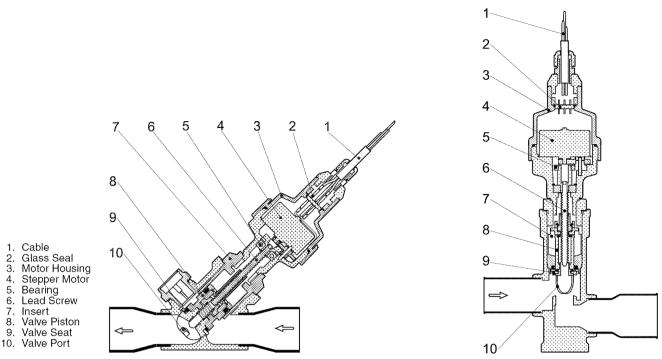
Cutaway Views of the Electronic Expansion Valve
